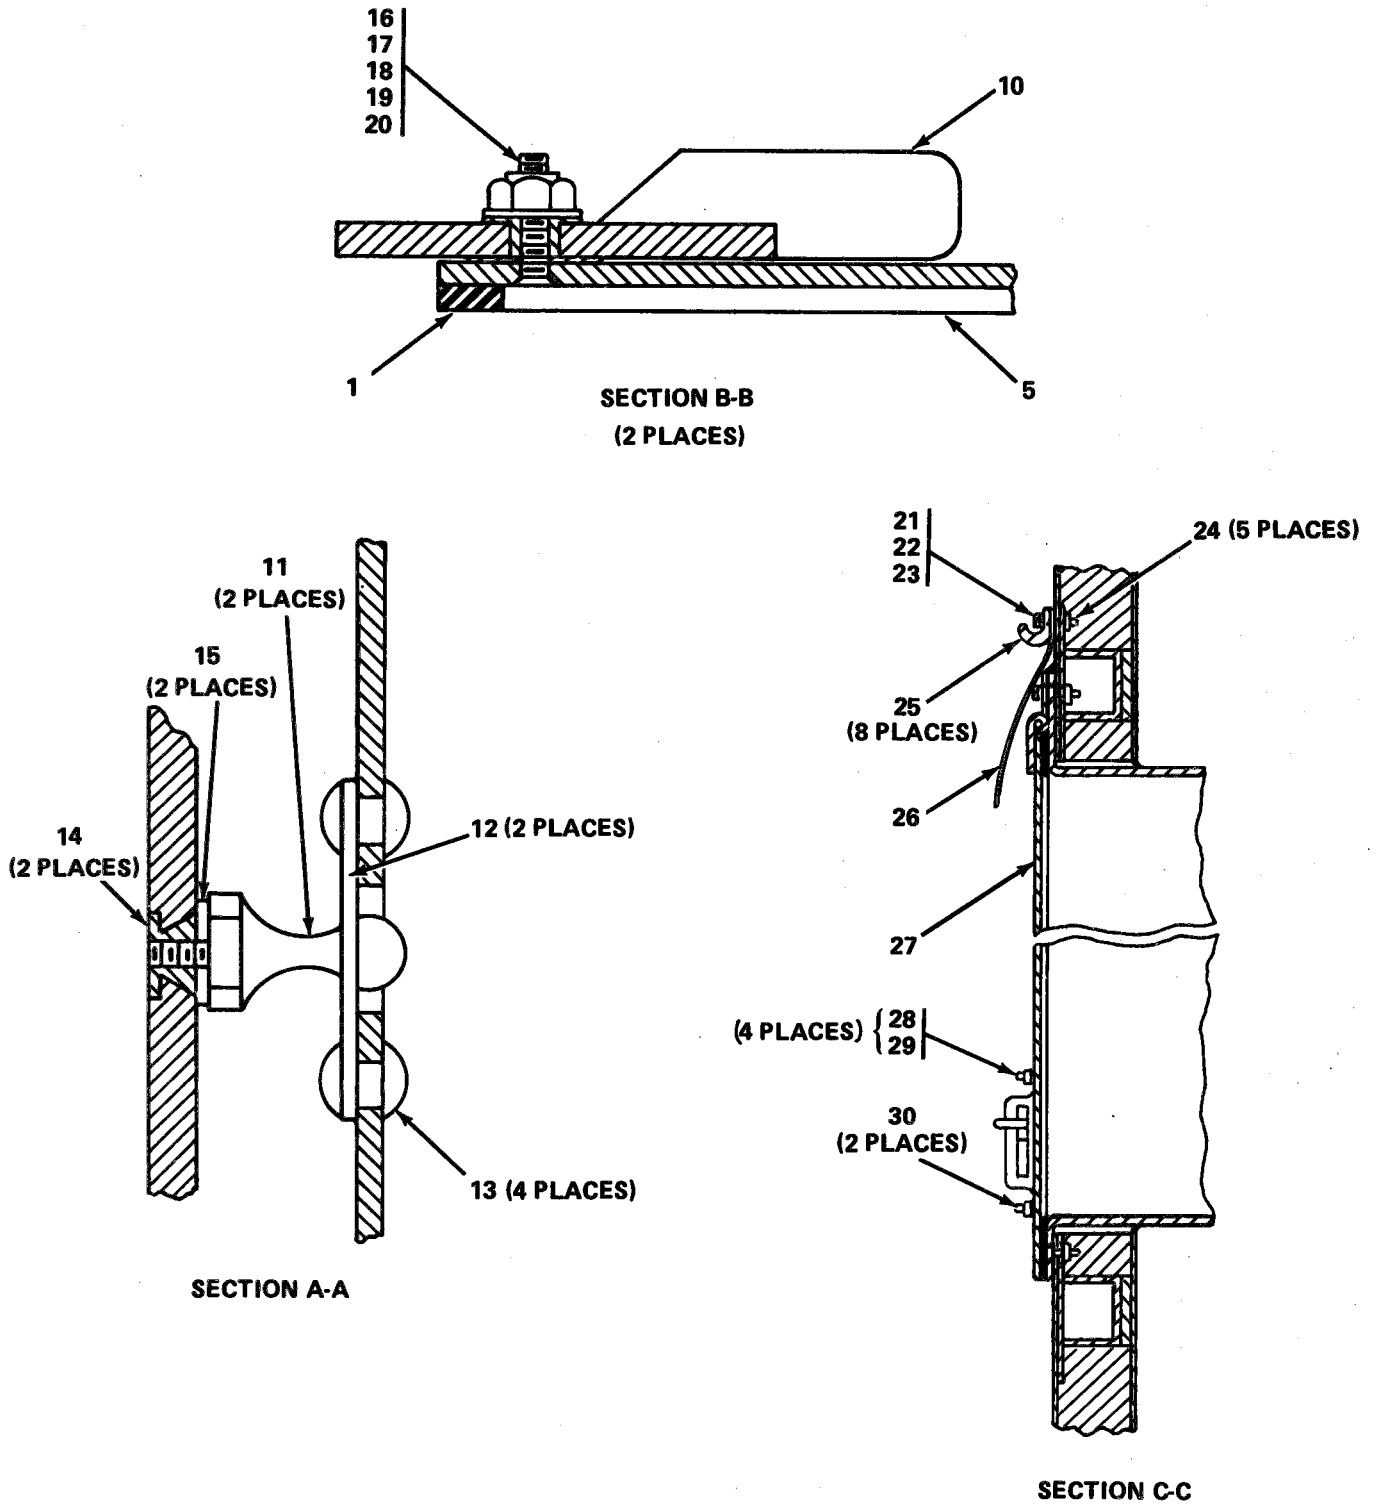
Power Entrance Box Cover Assembly (Sheet 3 of 4)
